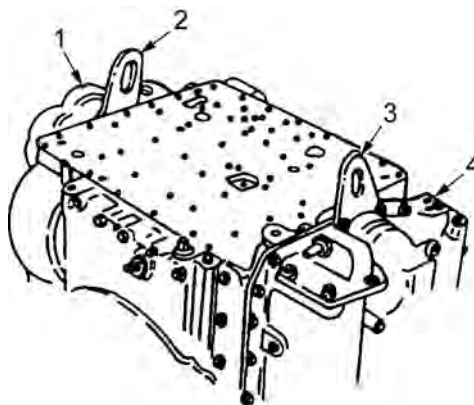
Right and Left Lifting Brackets Mounted on Right and Left Cover Assemblies.
